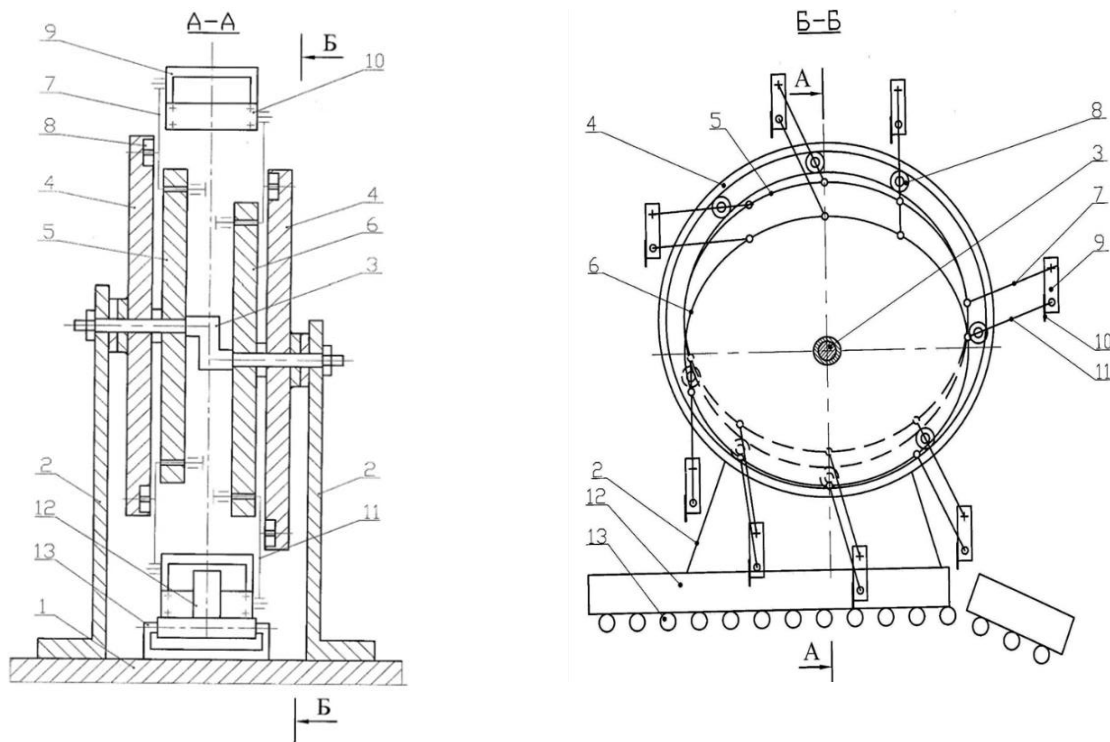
New universal continuous plastic soap bar cutting machine. 1- base, 2- machine column, 3- crankshaft, 4- drum, 5, 6- machine copy, 7, 11- one-shoulder levers, 8- roller, 9- cutting element, 10- cutting blade, 12- plastic bruce, 13-rolgang.
